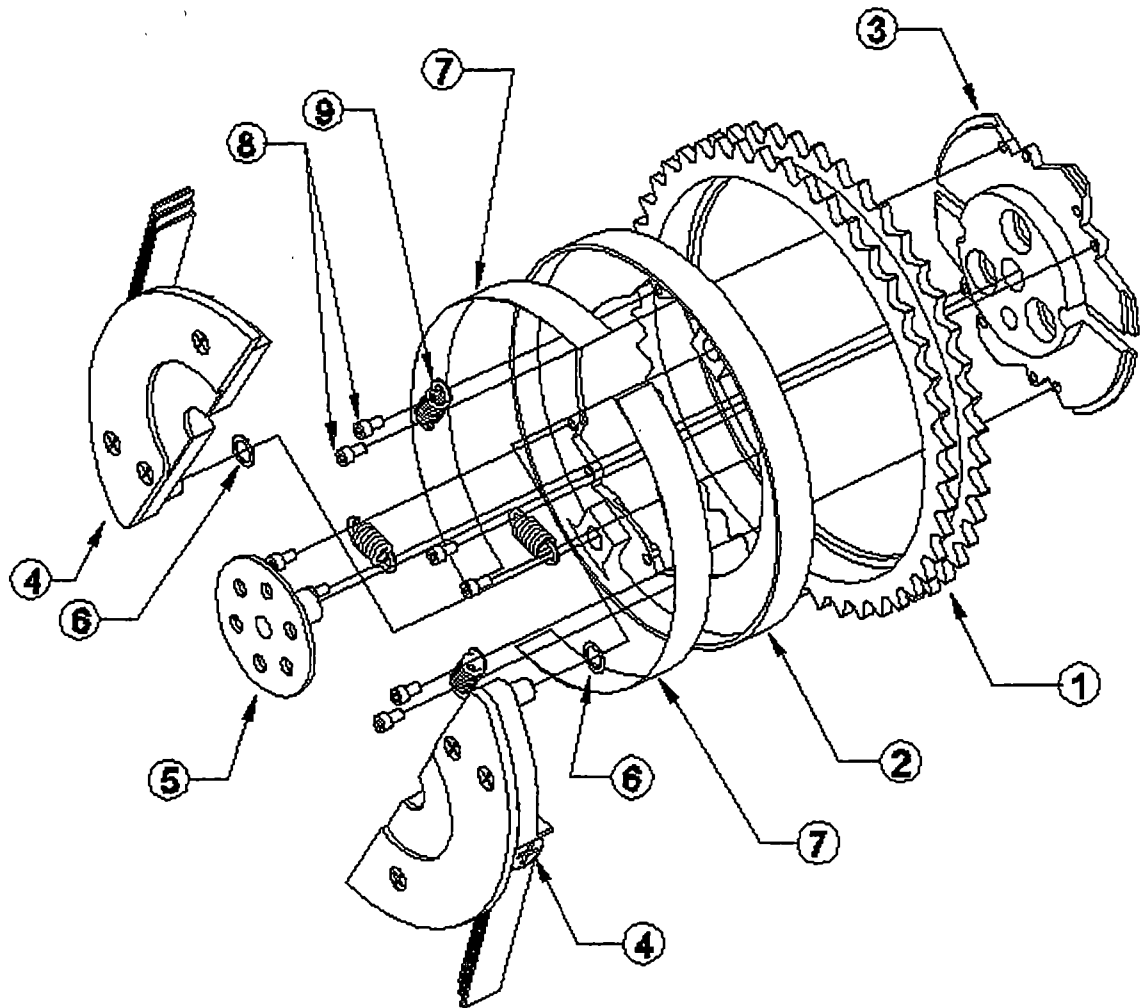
Exploded Assembly View of the Prototype VCP Mechanism
